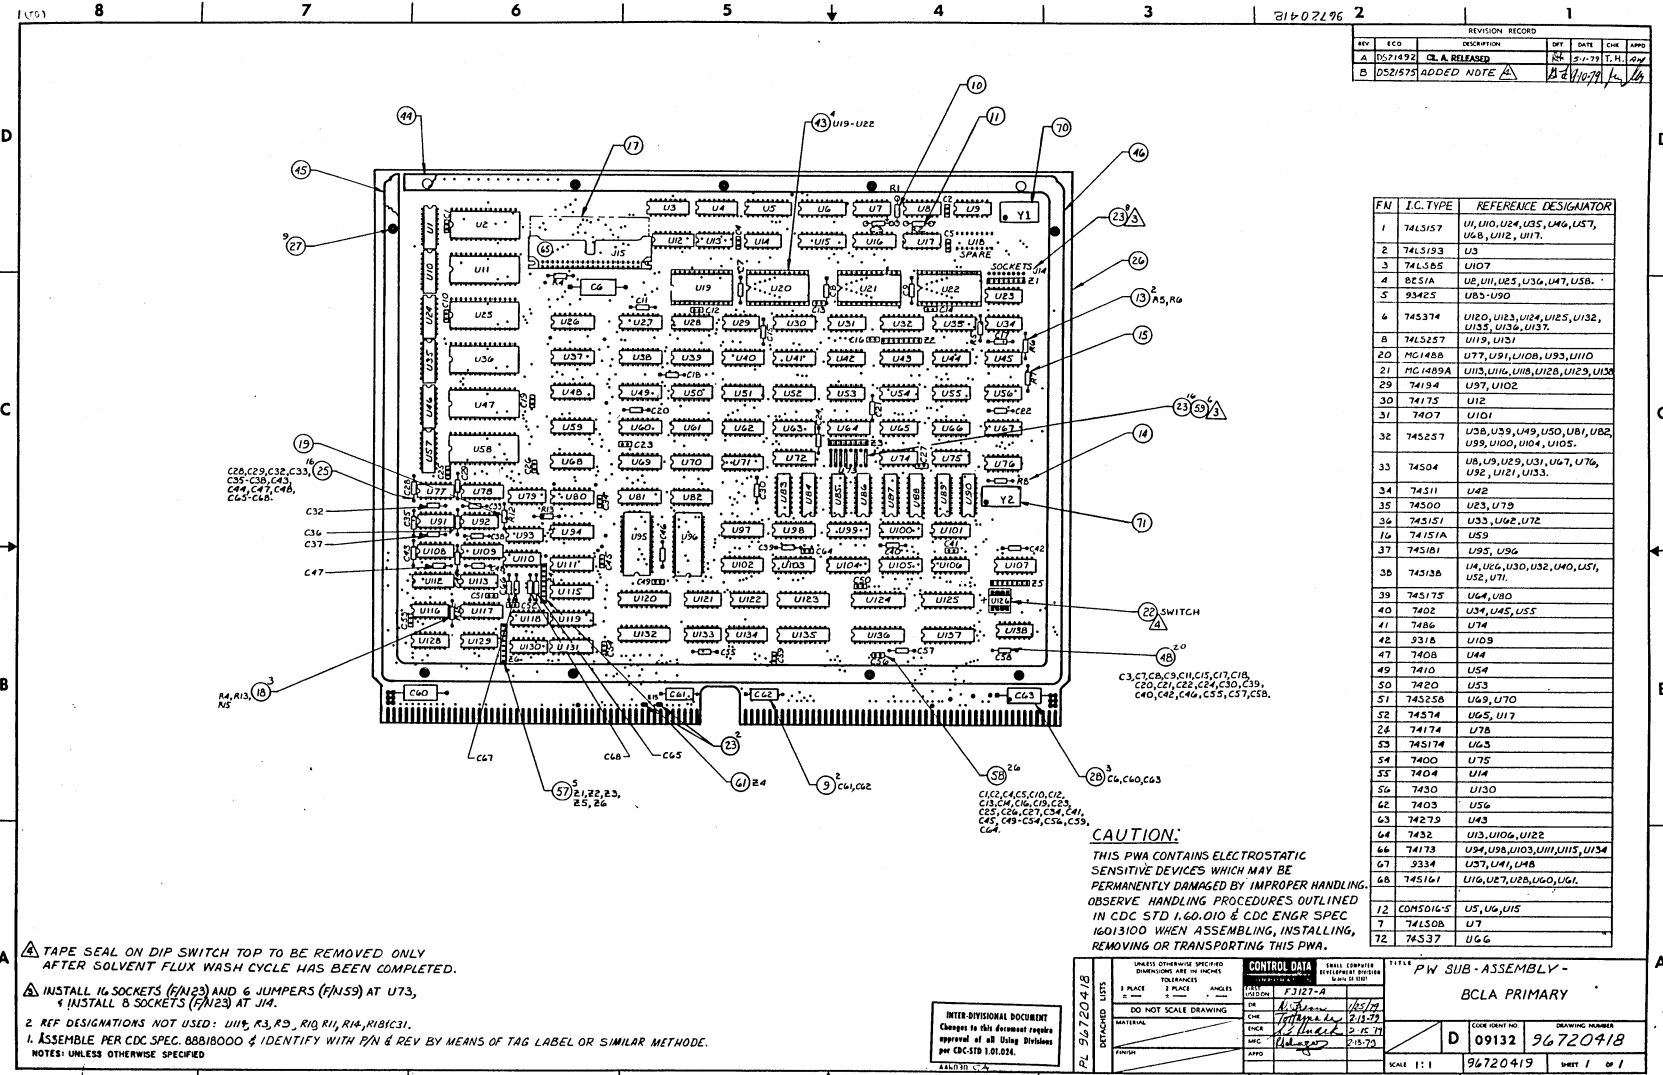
Primary BCLA Printed Wiring Sub-Assembly (Sheet 1 of 3)
